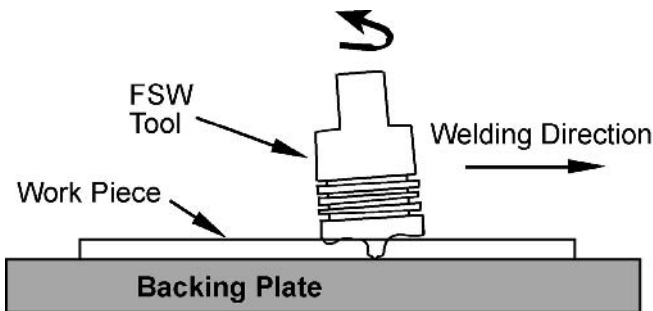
Schematic of friction stir welding (FSW) apparatus (courtesy M. Juhas, The Ohio State University)
